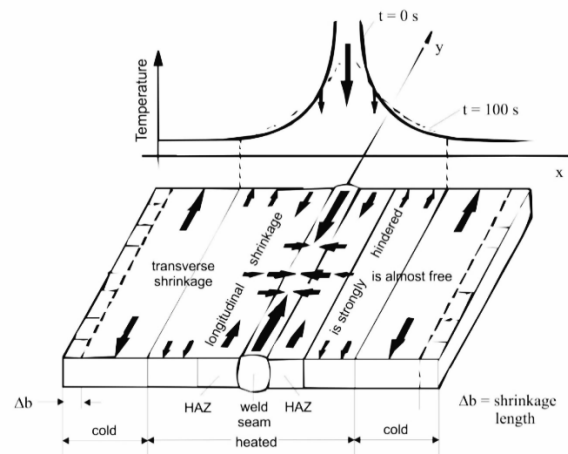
Shrinkage tendency and constraint conditions in a single pass weld (schematically) [3]
